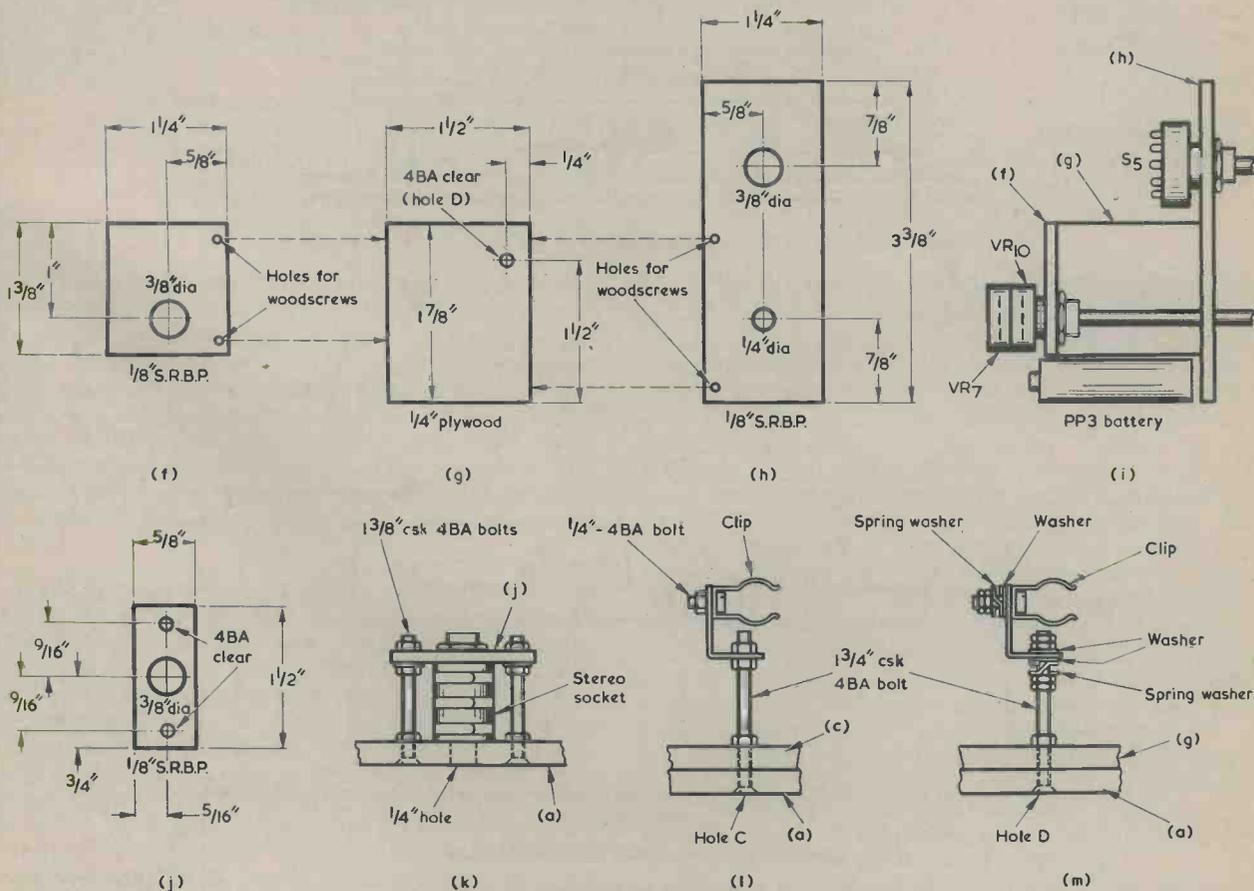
(f) (g) (h) (i). A similar form of mounting assembly is employed for the dual potentiometer VR7/VR10 and S5
